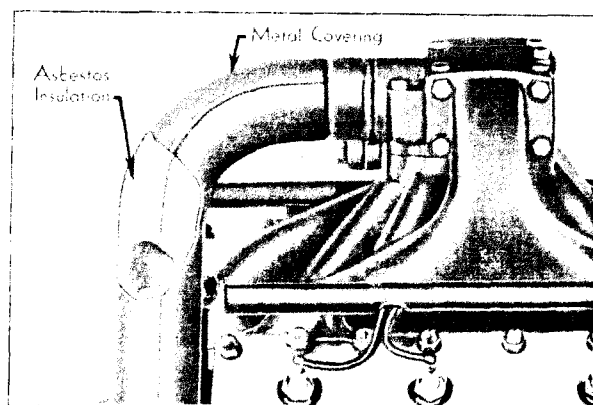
The exhaust pipe is covered with heavy asbestos lagging
